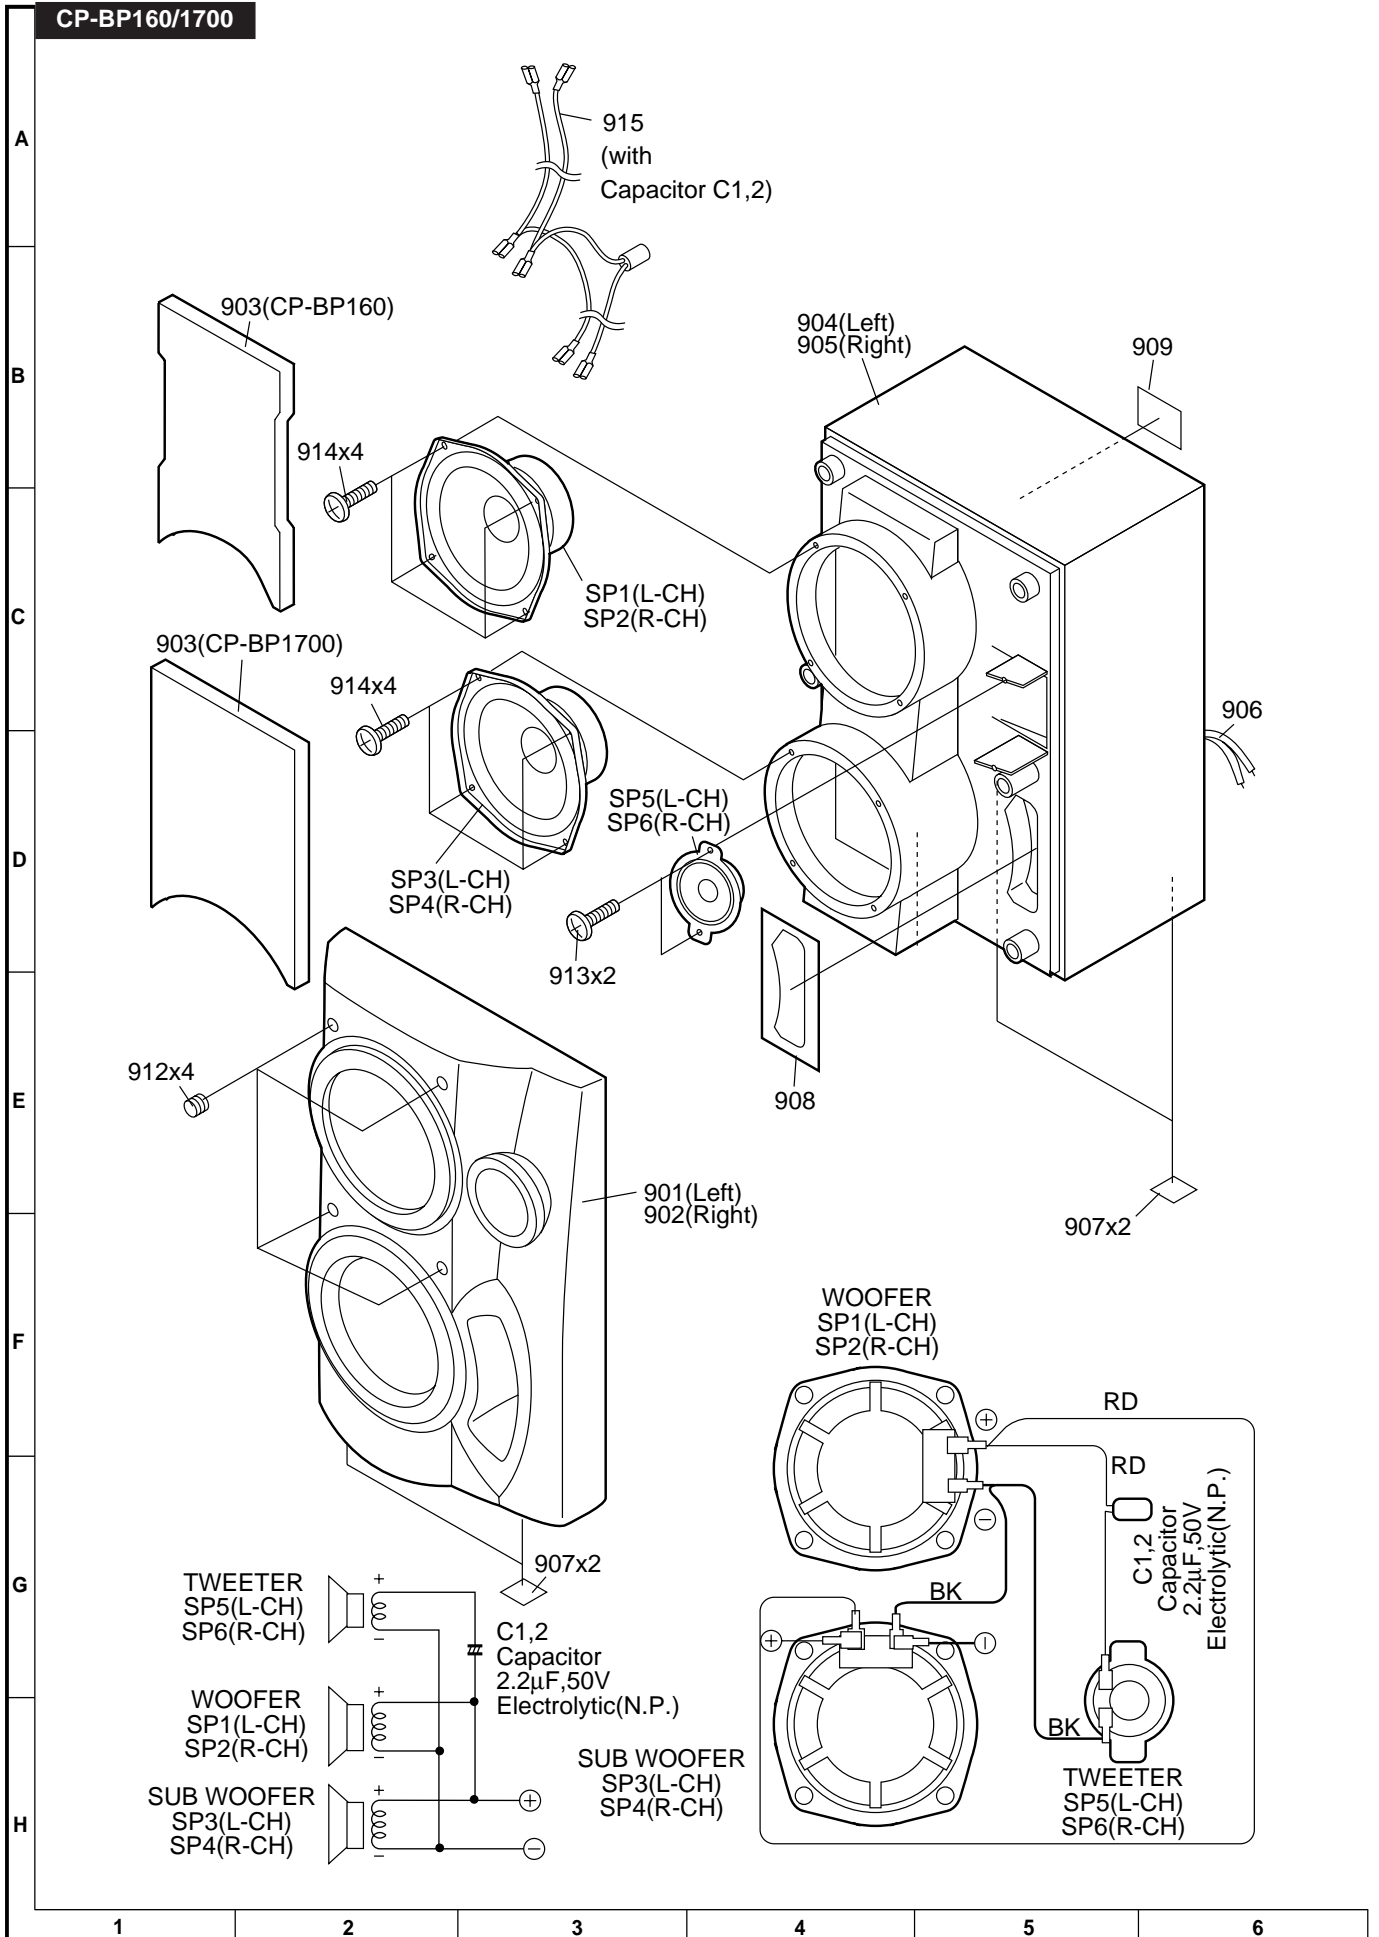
SPEAKER EXPLODED VIEW (2/3)
